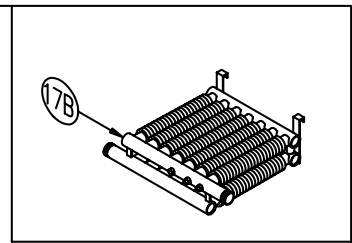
GENERAL ASSEMBLY PARTS LIST
